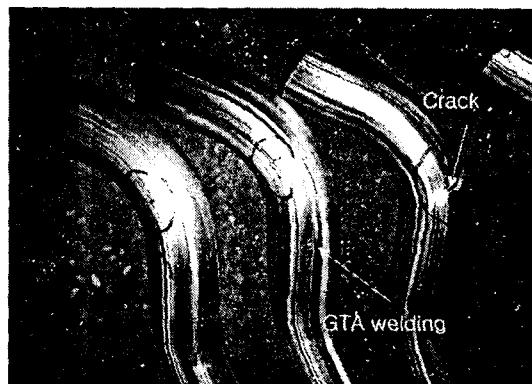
Cracks of GTA welded pipe for bending test
